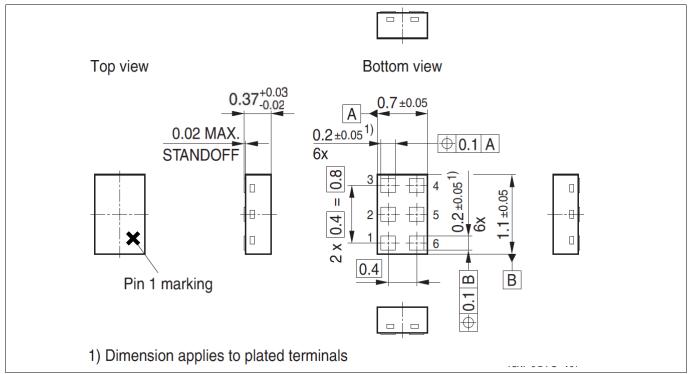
TSNP-6-10 Package Outline (top, side and bottom views)
